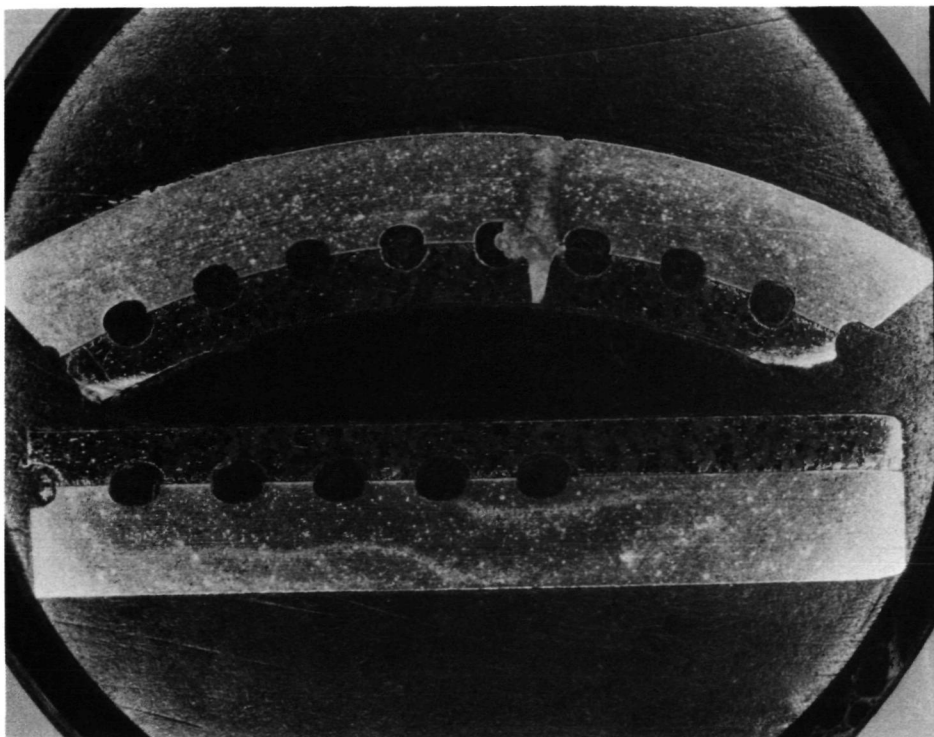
Electron Beam Welded Bend Test Sample ENB-2
